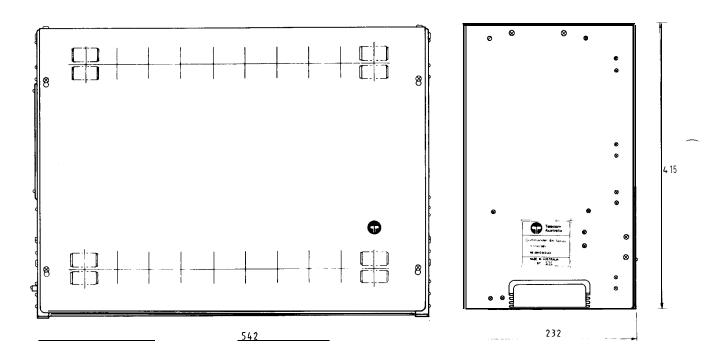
(b) BN-1236 MAIN EQUIPMENT CABINET DIMENSIONS
